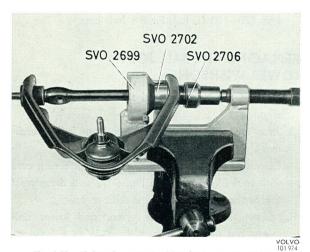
Fitting the second rubber bush, upper wishbone
